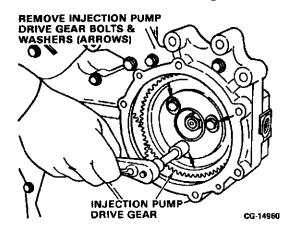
Remove Injection Pump Drive Gear Bolts
